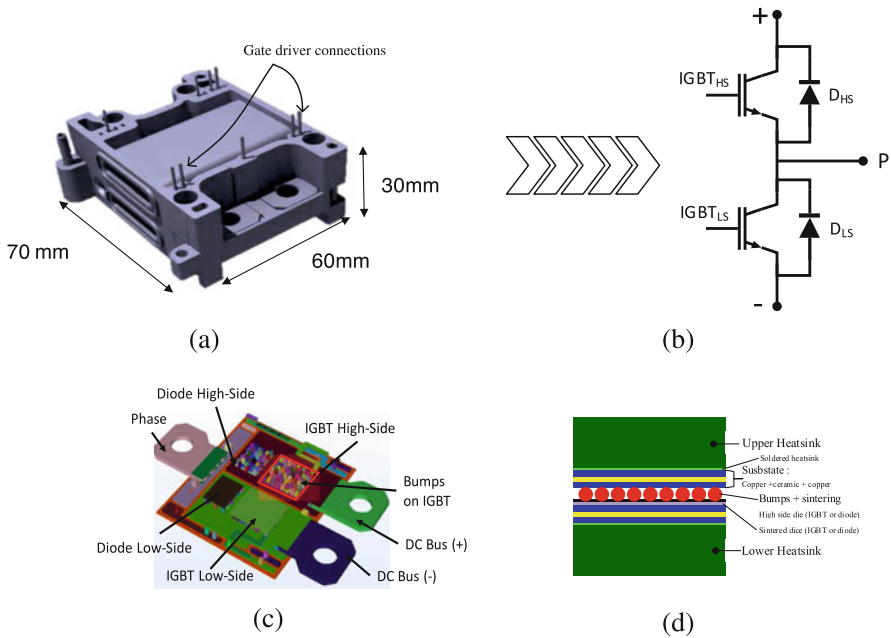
DUT: double-sided cooling Si IGBT/diodes power module. (a) 3D view. (b) Electrical circuit. (c) Inside. (d) Cross section of the die assembly
